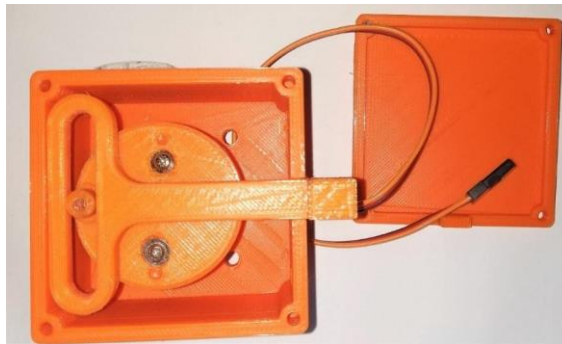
Servo motor and the Scotch yoke 3D printed mechanism
